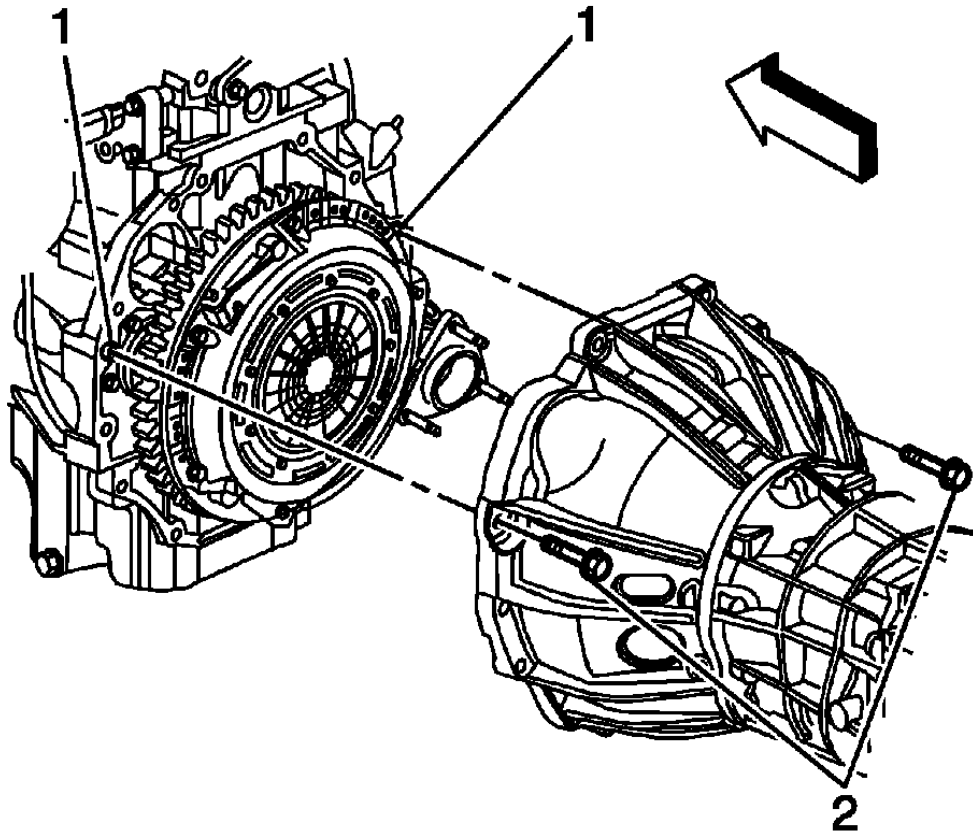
View Of Transmission Mounting Bolts & Engine Dowels
